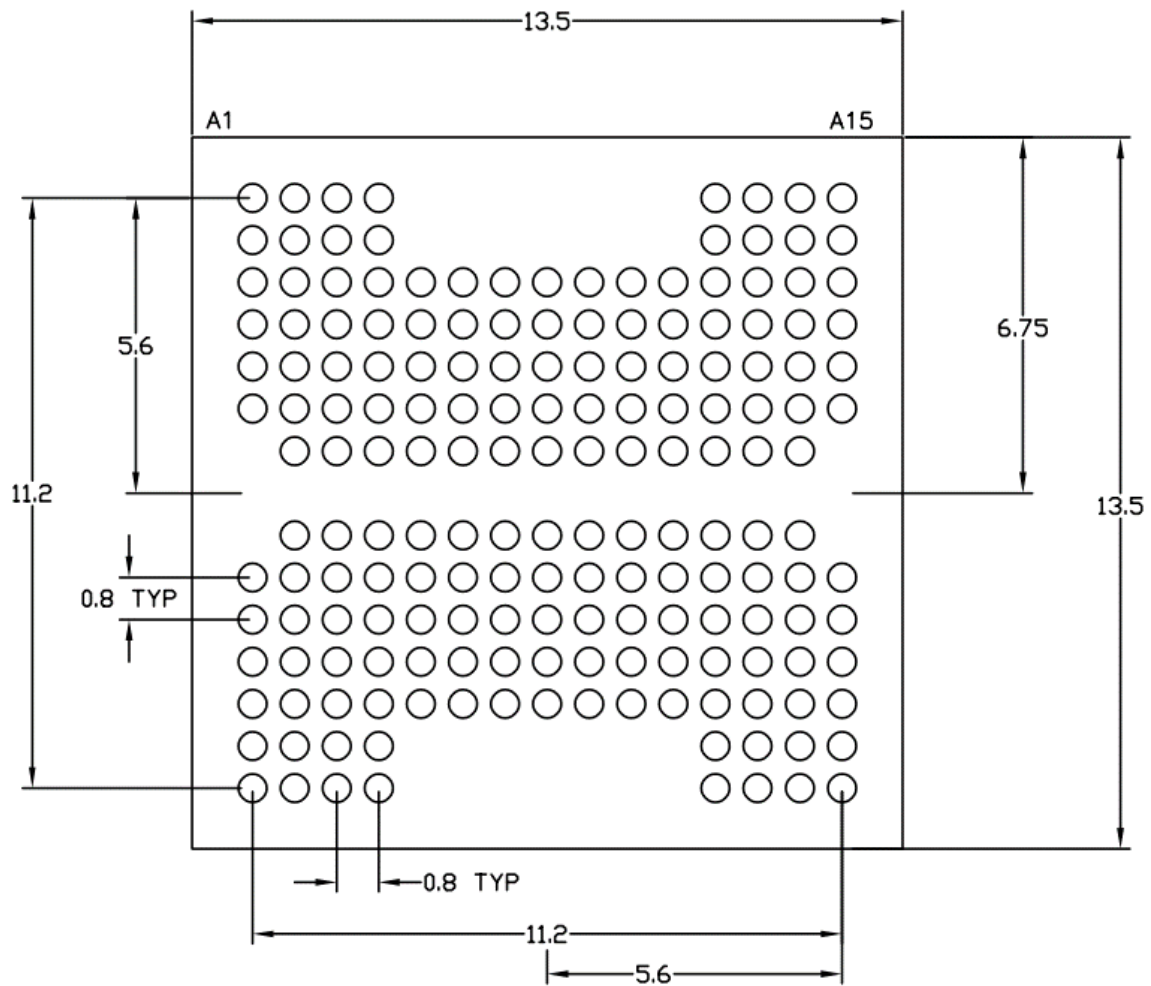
BGA-178 ball spacing requirements (top view, dimensions in millimeters)
